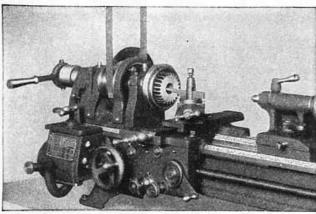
Boring a Pinion held in Step Chuck Fitted to the 9-inch Quick Change Gear Bench Lathe
